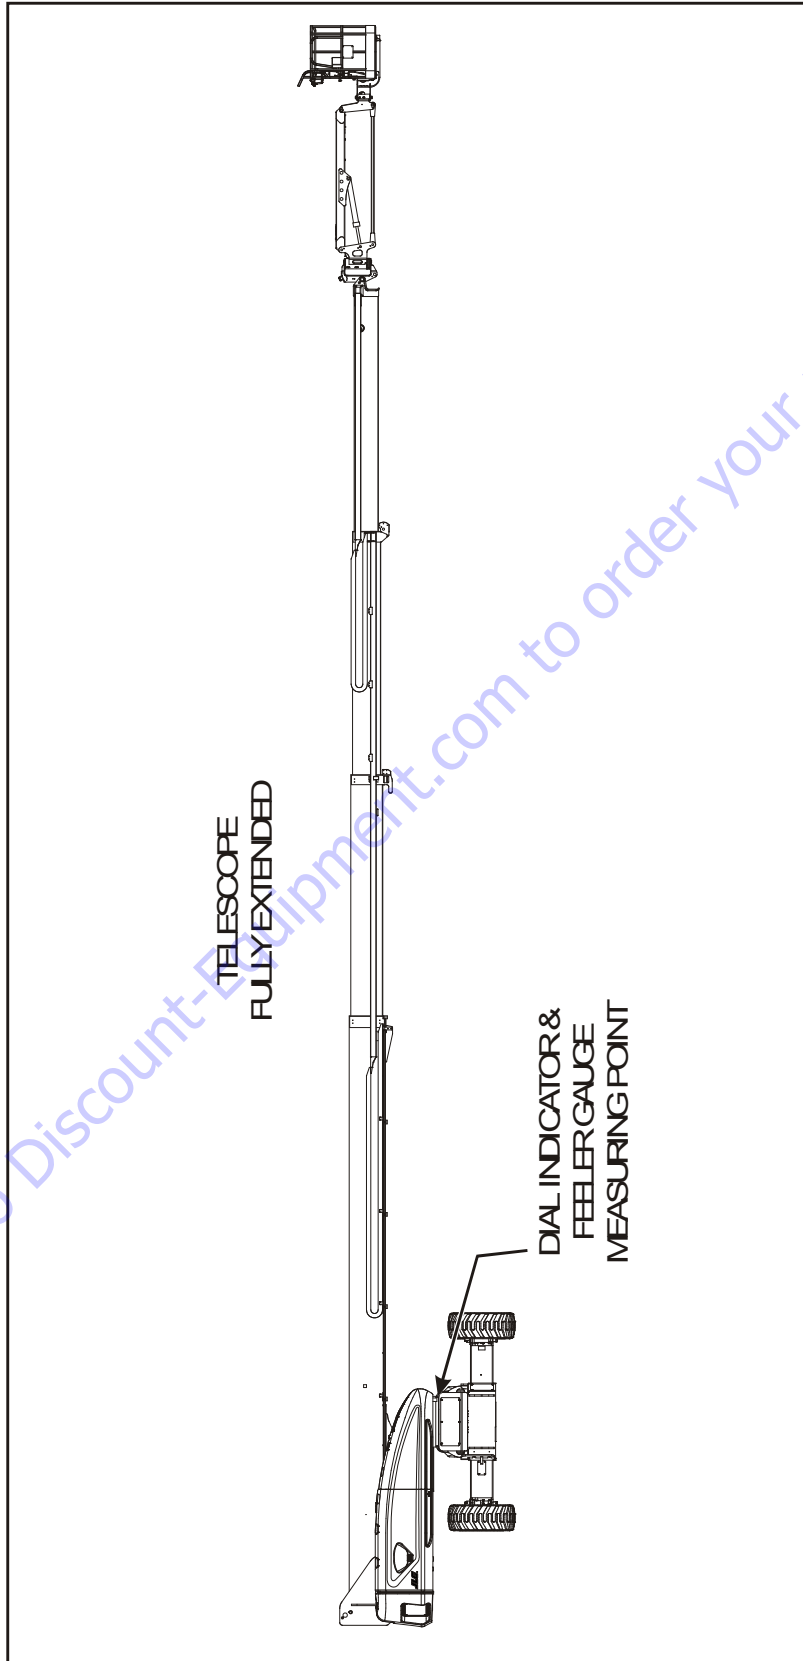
Swing Bearing Tolerance Boom Placement - Sheet 2 of 2
